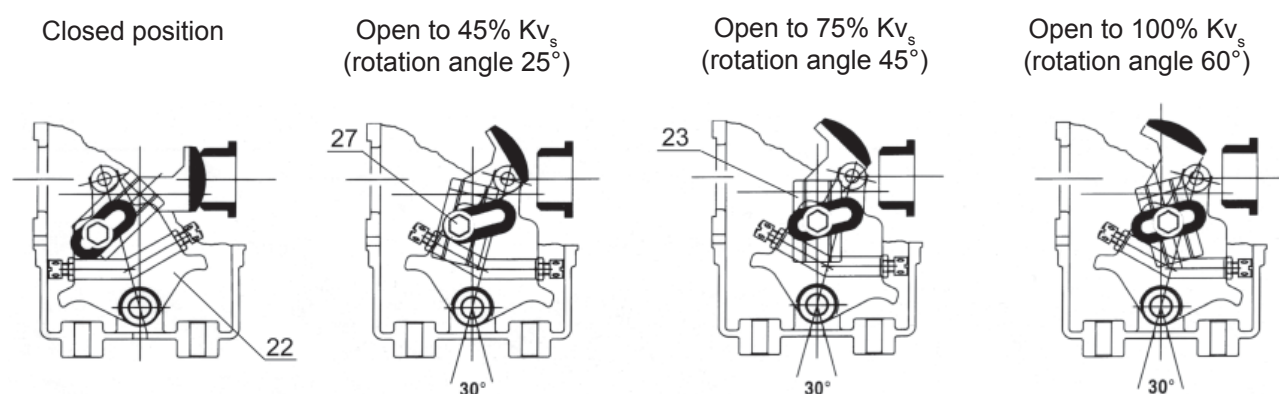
Bearing pin (27) position on lever (22) regarding crankshaft (23) (valve shaft - Kv_s) rotation angle.
